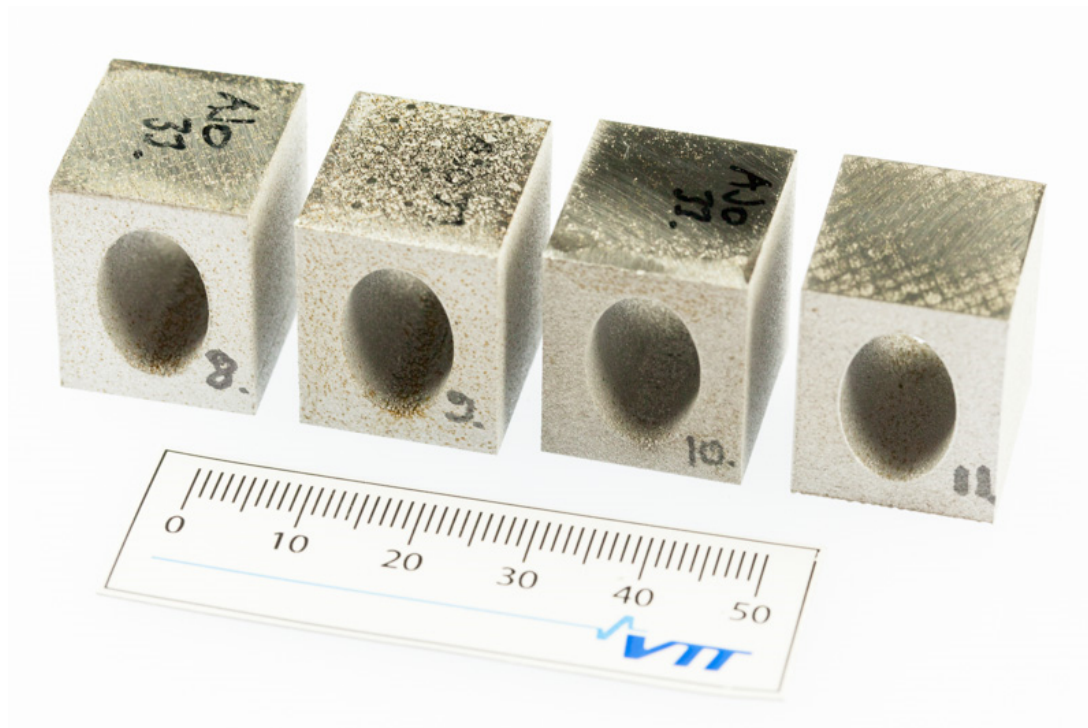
The elliptic hole test pieces printed in H13 tool steel at 30 μm layer thickness.
